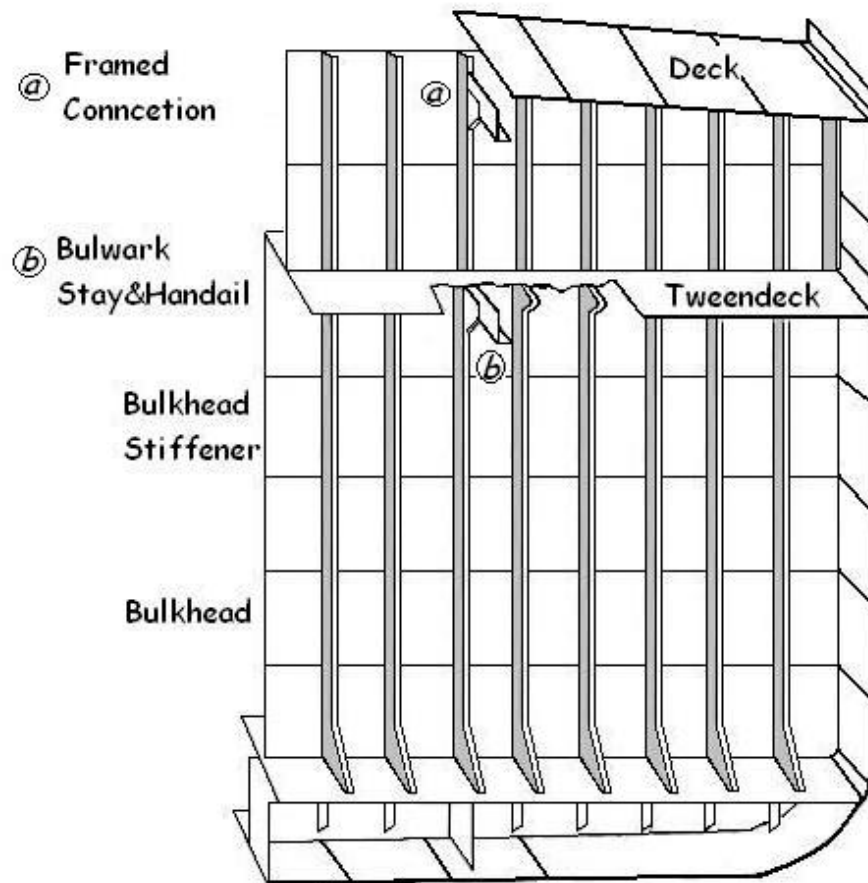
Partial Watertight Plane Bulkhead Construction (AMSP, 2006)
